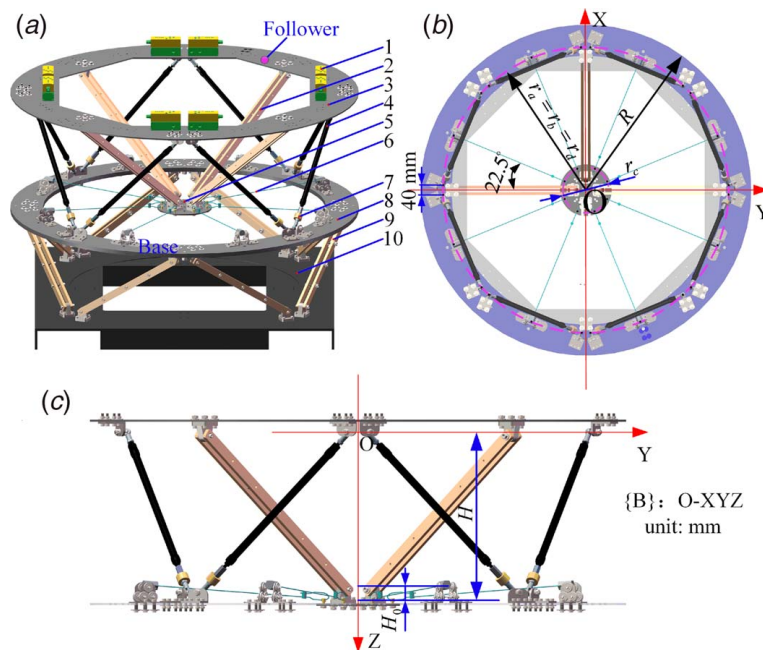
Experiment setup. (a) Three-dimensional view. (b) Top view of the tensegrity joint. The base is recolored, and the plate is transparent to show the dimensions clearly. (c) Front view of the tensegrity joint. This experiment platform is a two-layer structure. The bottom layer is a fixed parallel mechanism to support the top layer, i.e., the tensegrity joint. There are many components: (1) proportional pressure valve, (2) support bars of the follower, (3) follower plate of tensegrity joint, (4) pneumatic muscles, (5) follower's foot, (6) cables, (7) force sensor, (8) base of tensegrity joint, (9) fixed bars of the base, and (10) foundation. The follower's mass is about 38.9 kg, and its center of mass is about [0 0 55] mm at the base frame B.
